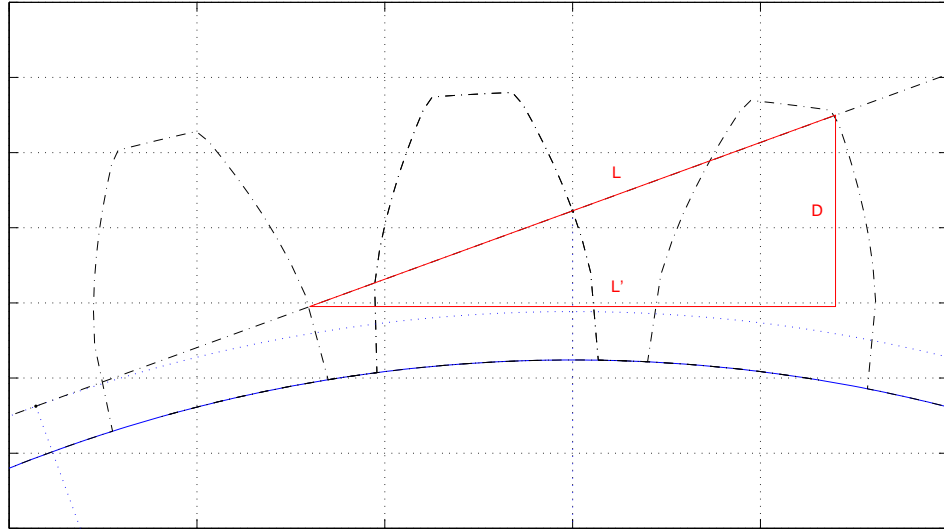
Gear tooth ranges, L and D , relative to tooth rotation.
